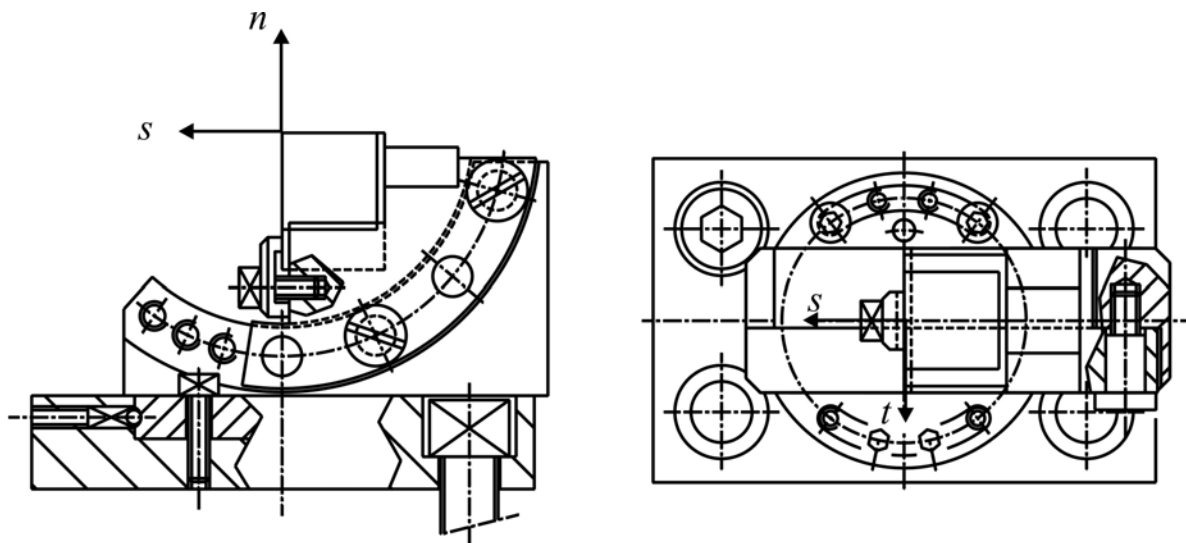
Drawings of the cutter holder with adjustable back and side rake angles. Side and top view of the cutter holder, after Marc Radermaecker and Abdelhakim Hahati, 2002.
